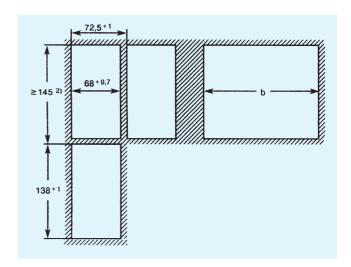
/11 SIPART DR21 controller, dimensions in mm
